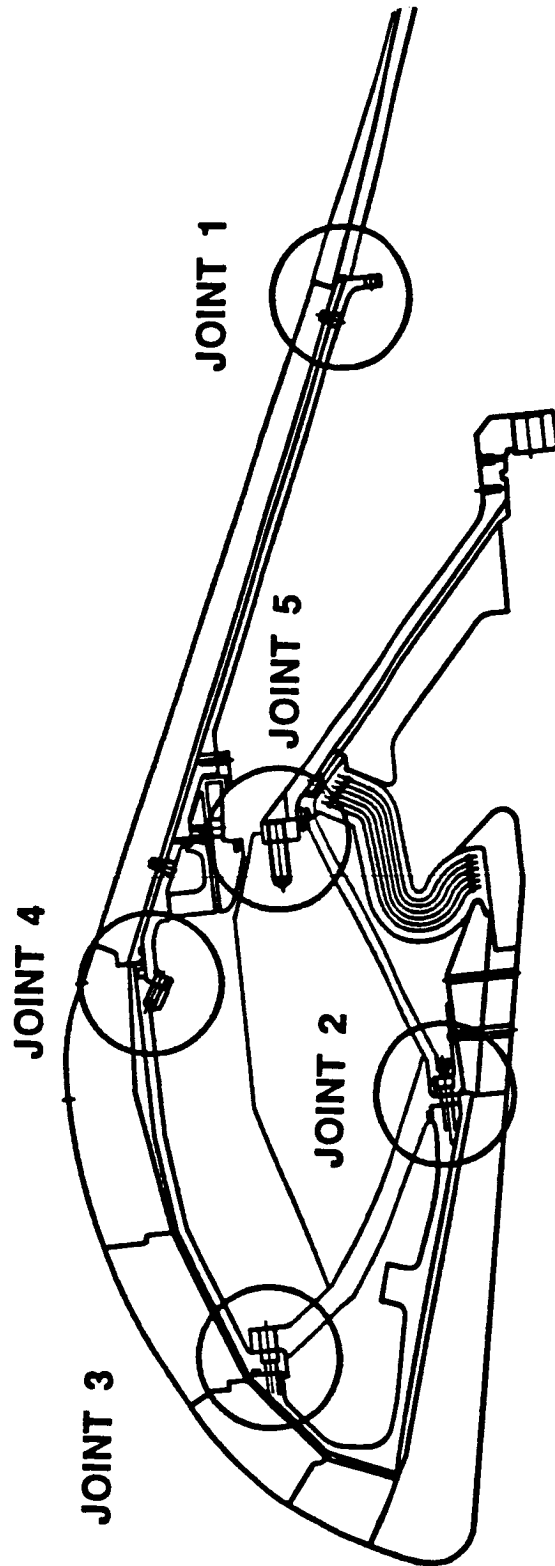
SRM NOZZLE JOINTS.
